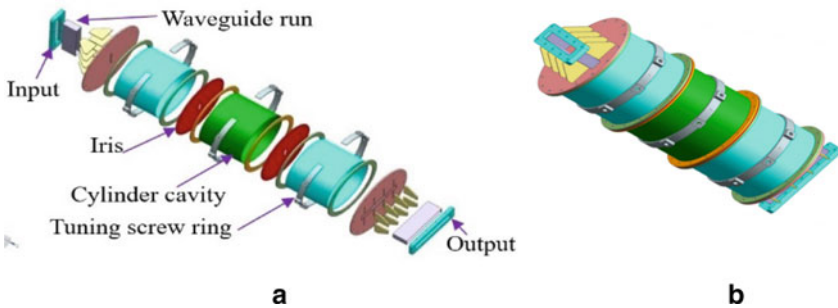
a Exploded view of S band cavity filter. b Assembled view
